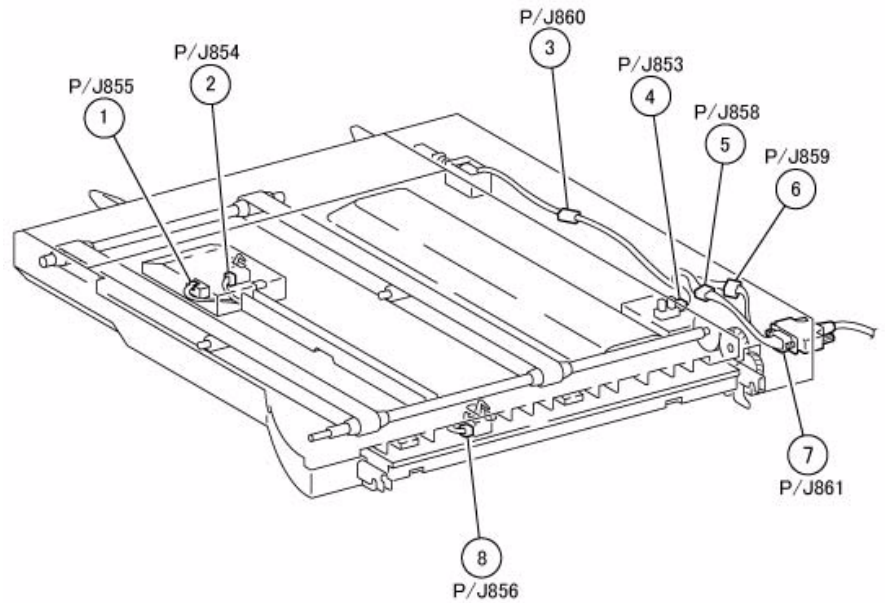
H-Transport Assembly - Office Finisher (j0sr7133)
